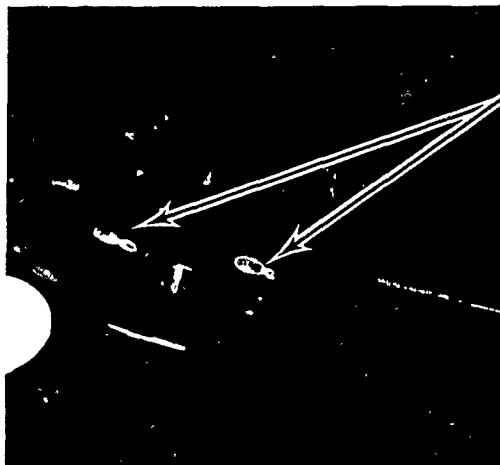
Detail of a typical crack shown in Figures 14 and 15.
